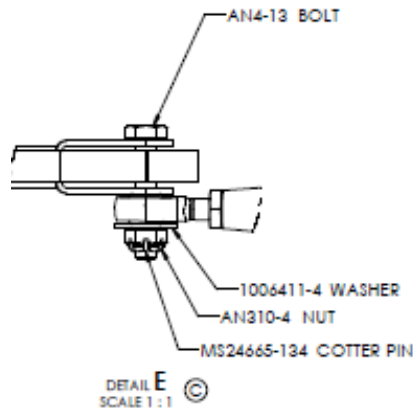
ELEVATOR IDLER BELLCRANK PUSH PULL TUBE INSTALLATION
